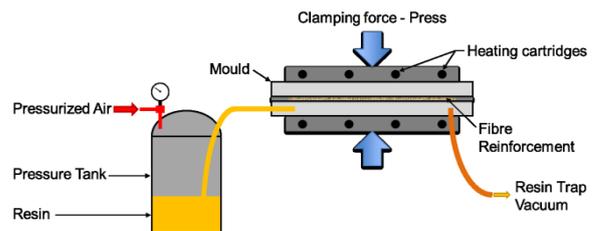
Resin transfer molding setup used to manufacture the composite panel
